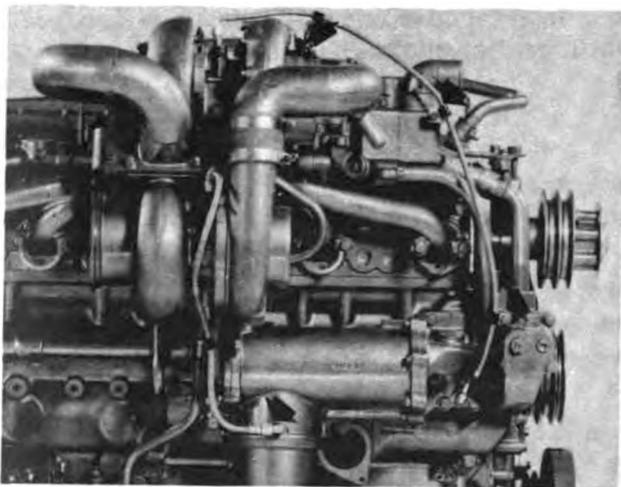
Location Of Hose Clamps And Oil Connections.
